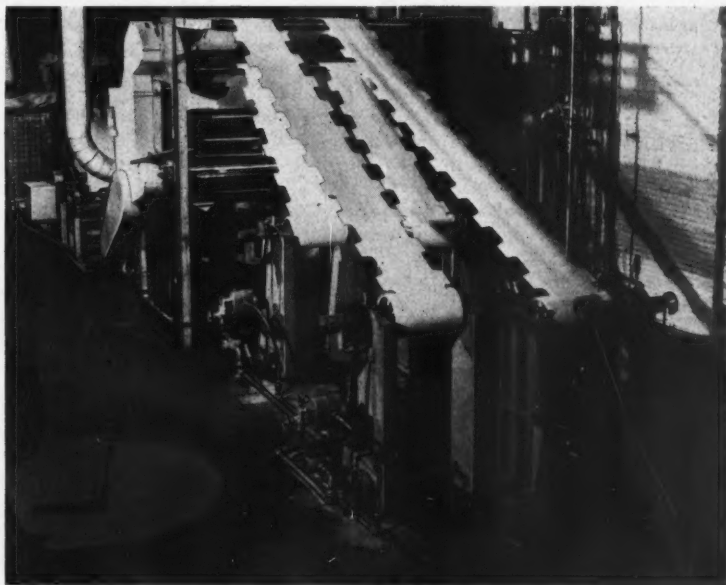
The four re-wind stands of the Monck blank cutting machine are driven by separate Keelavite hydraulic motors connected to a common pump
